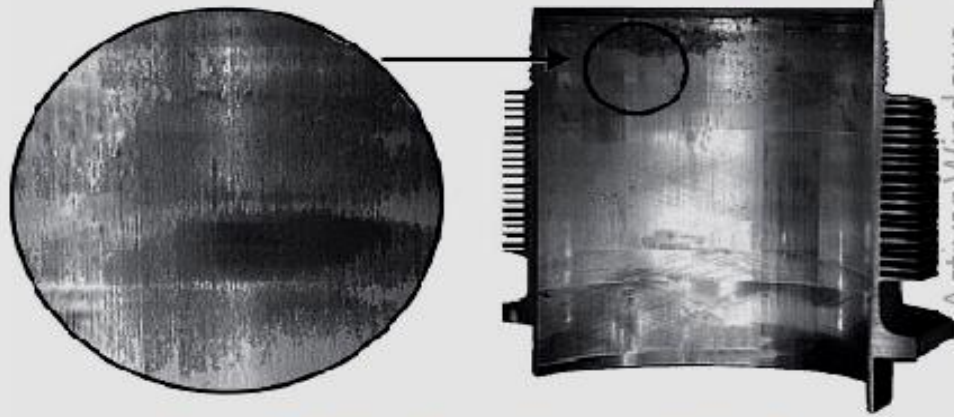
Cylinder Barrel Scoring and Piston Rub
